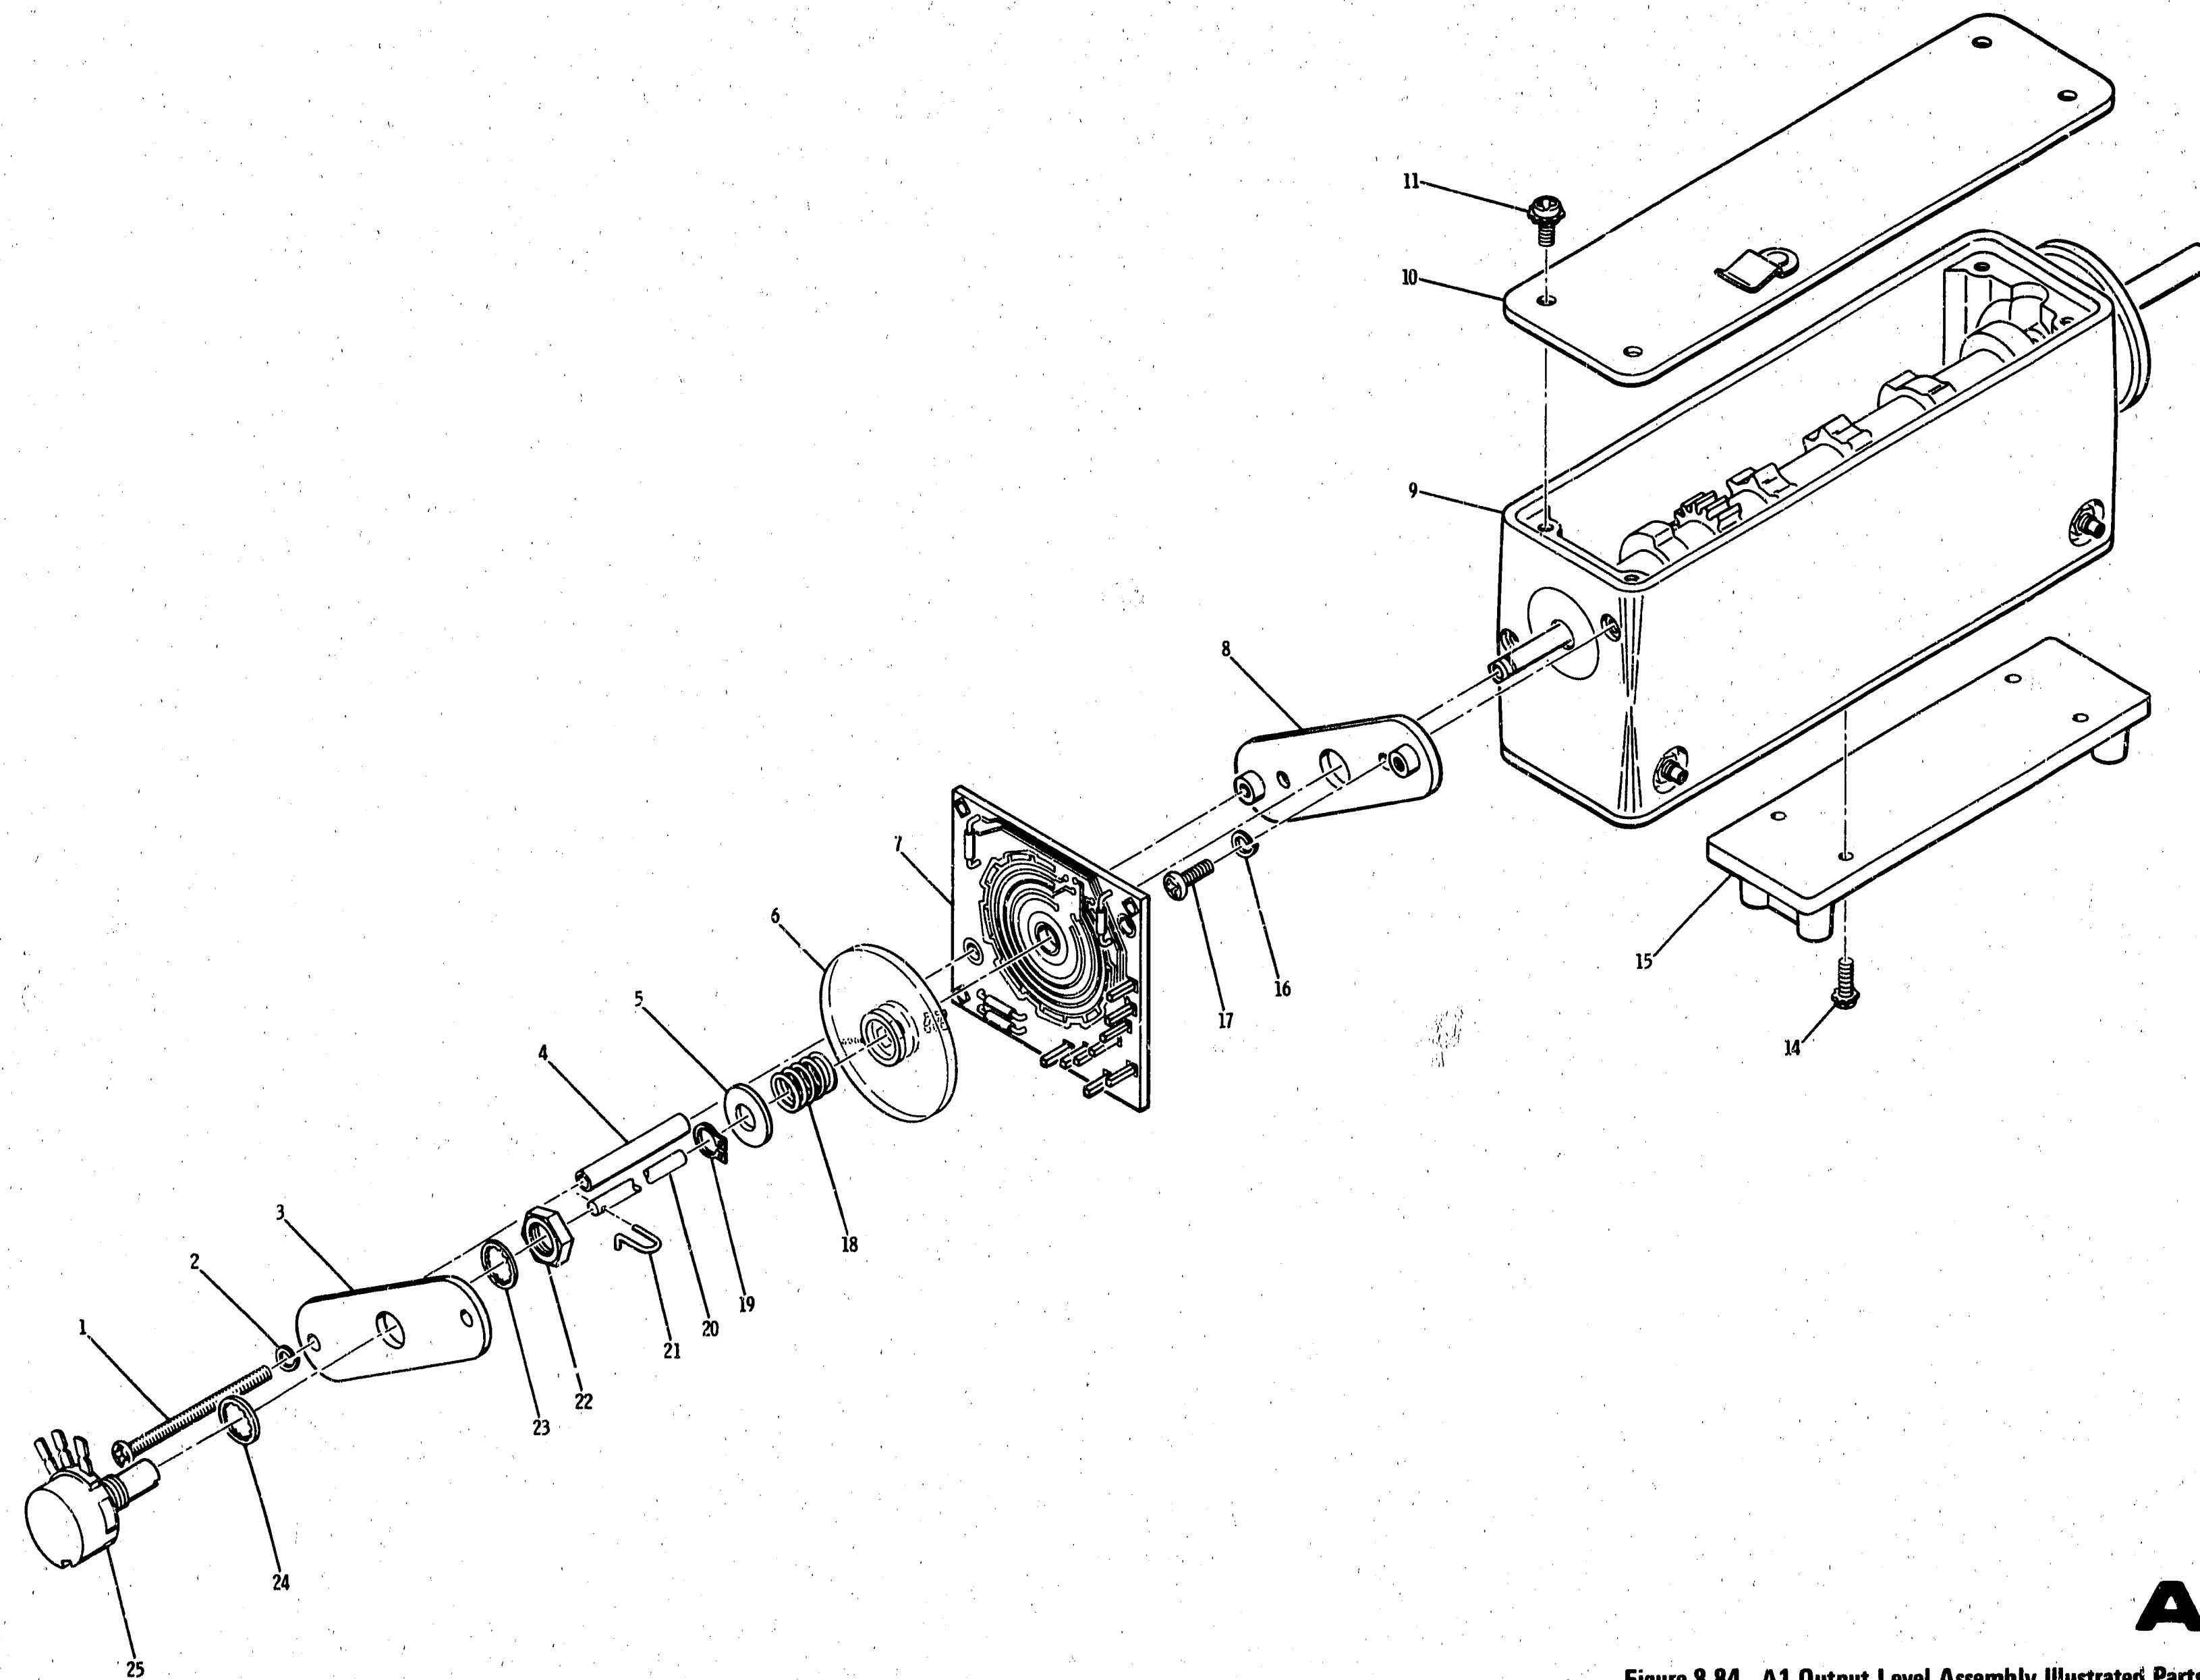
A1 Output Level Assembly Illustrated Parts Breakdown
